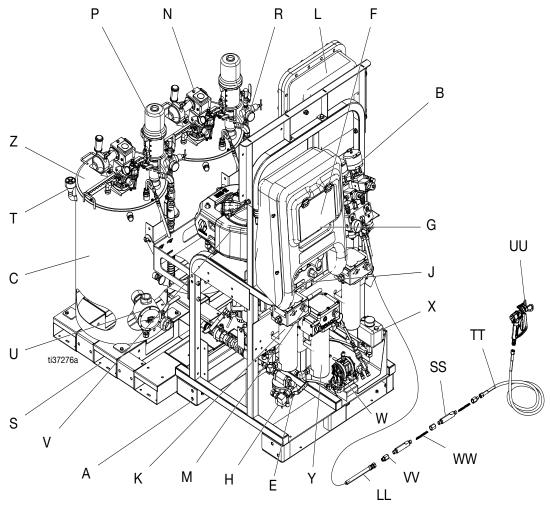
Typical Setup: 25 Gallon Double Wall Hopper with Recirculation (Front View)
